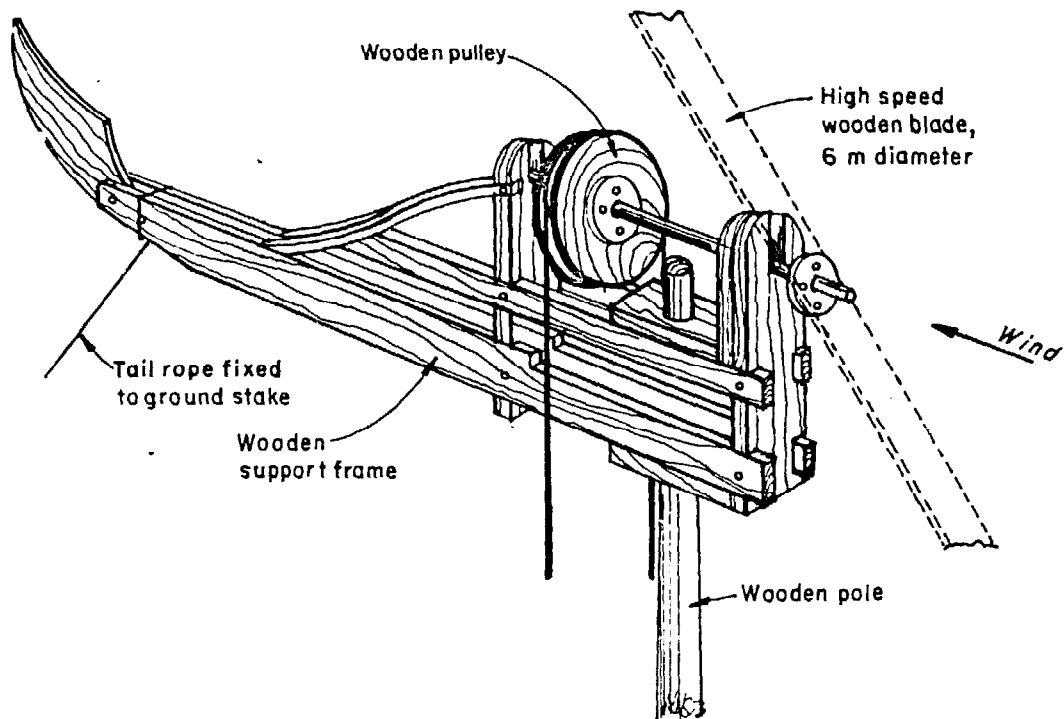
Thai high-speed rotor water pump — wooden mounting assembly
